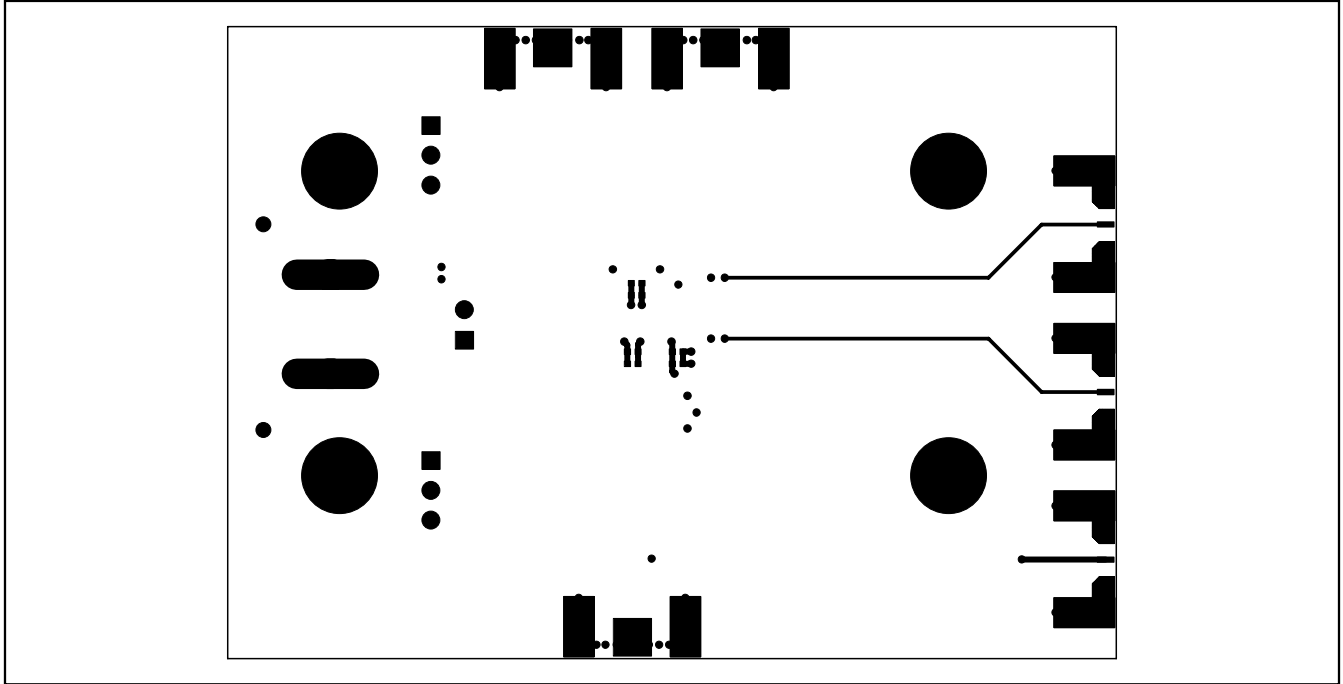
MAX3622 EV Kit Layout—Solder Plane
